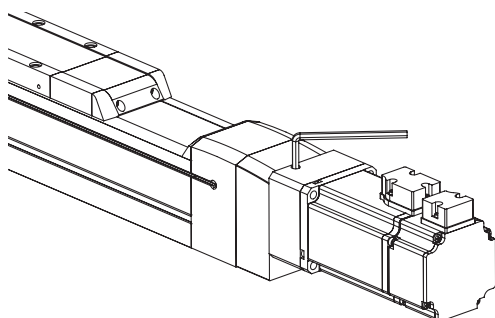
Tightening the clamping hub on the motor shaft
